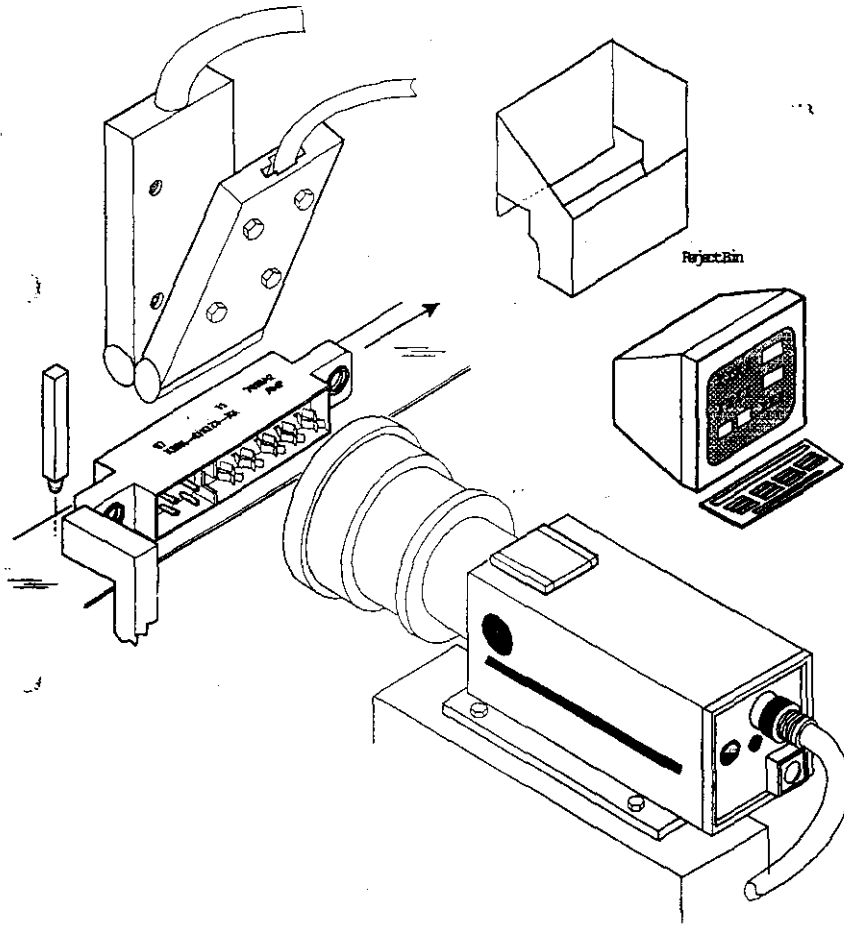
Housing Inspecting (AMP Inc., 1997)
